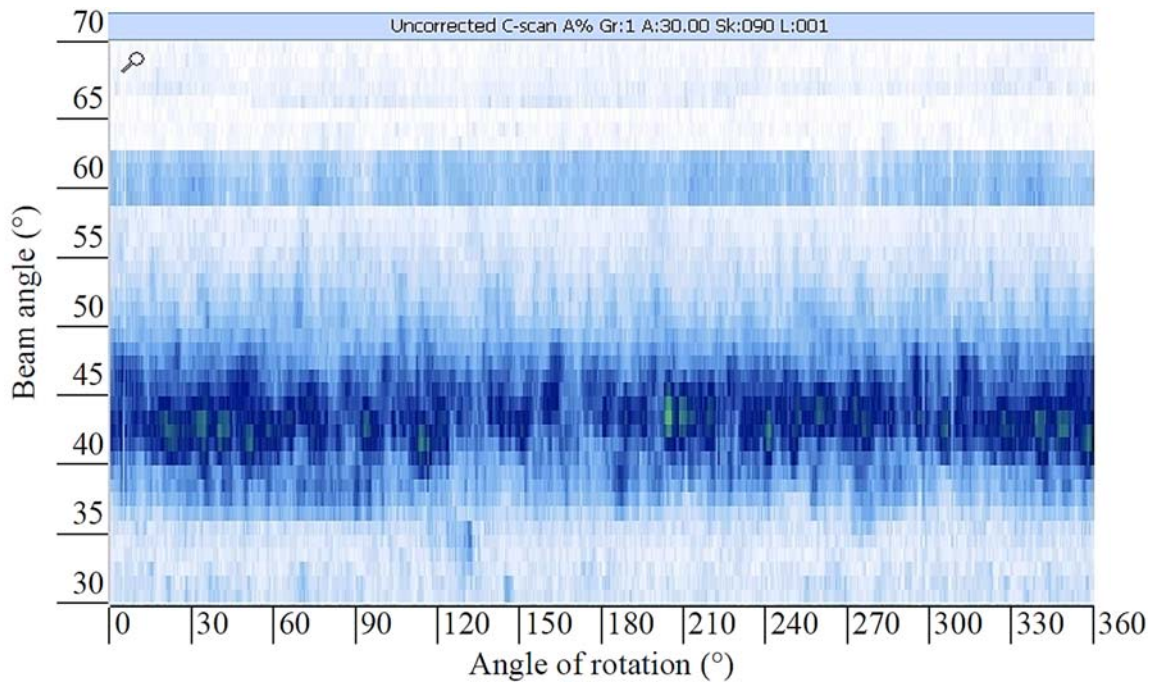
C-scan for a healthy axle with wheels and bearings
